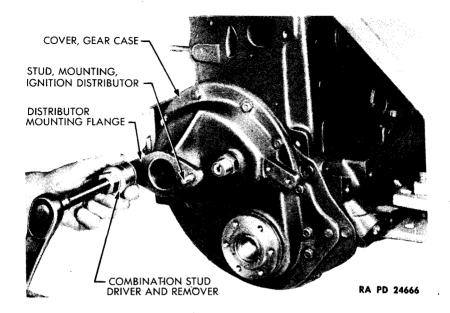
Removing Or Installing Ignition Distributor Mounting Studs
